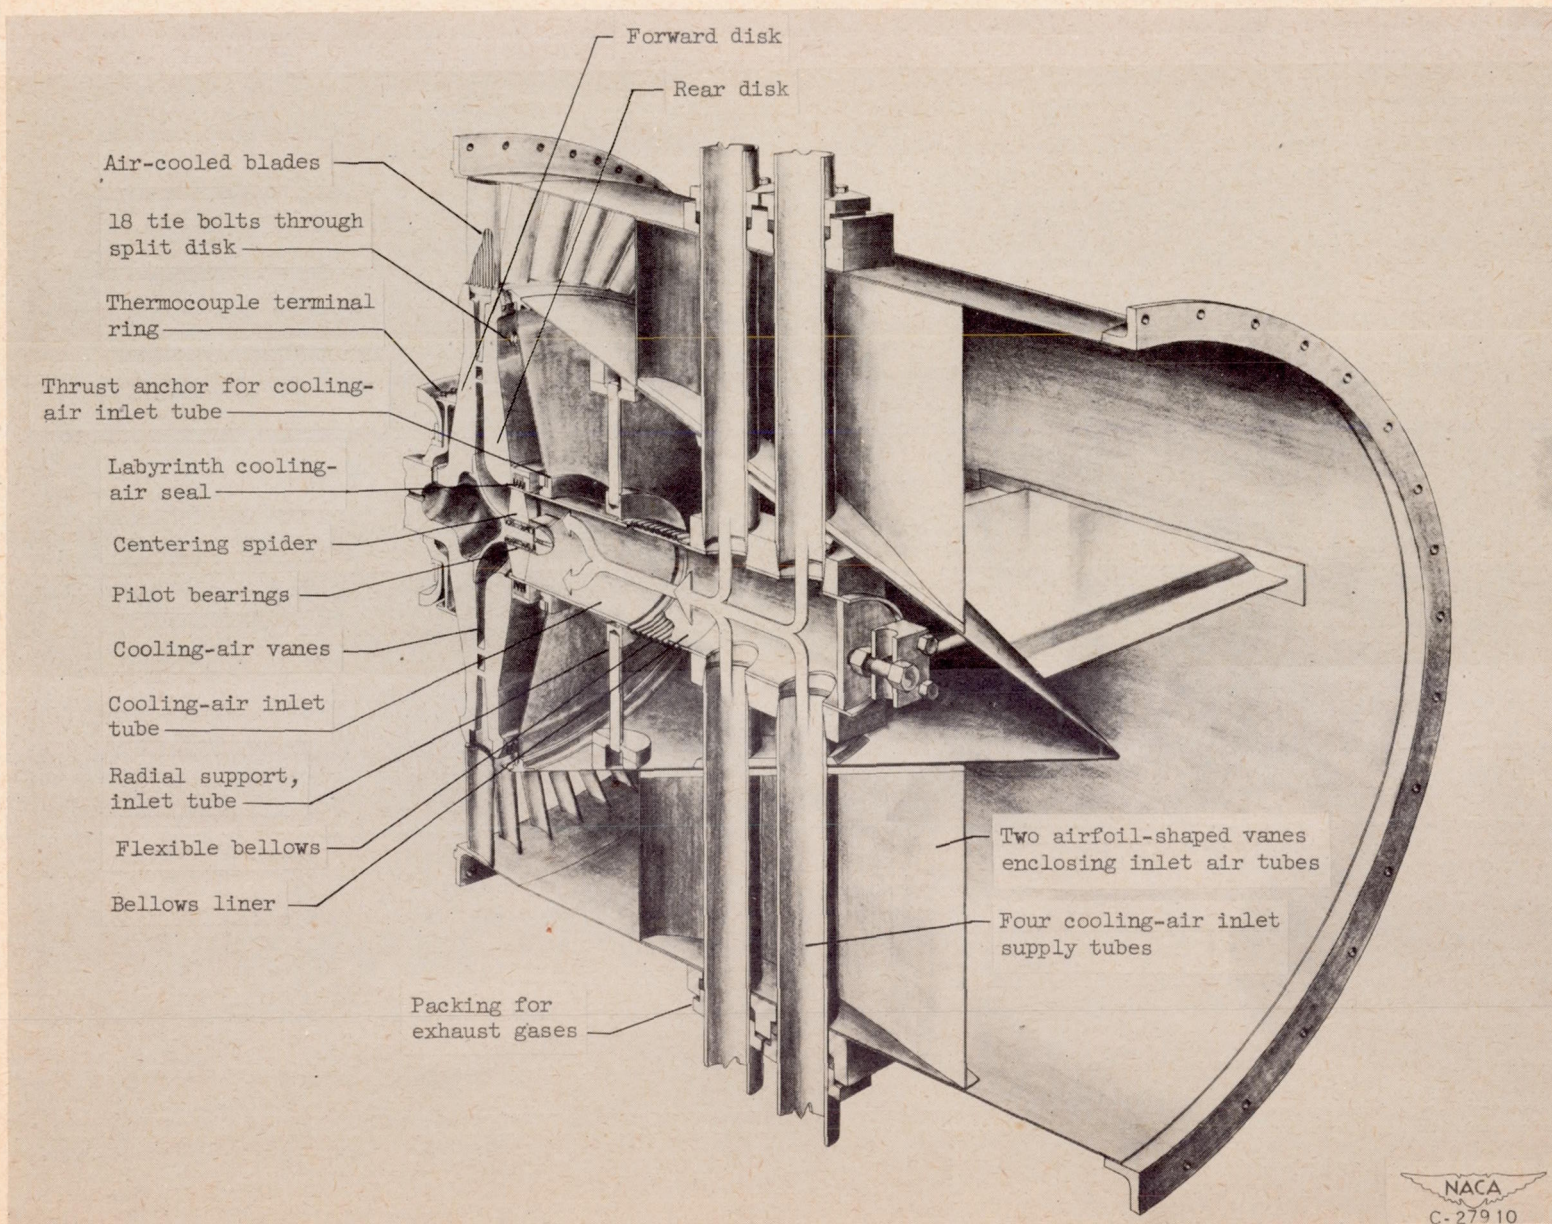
Assembly of split-rotor, rear-disk cooling-air induction system and tail cone.
